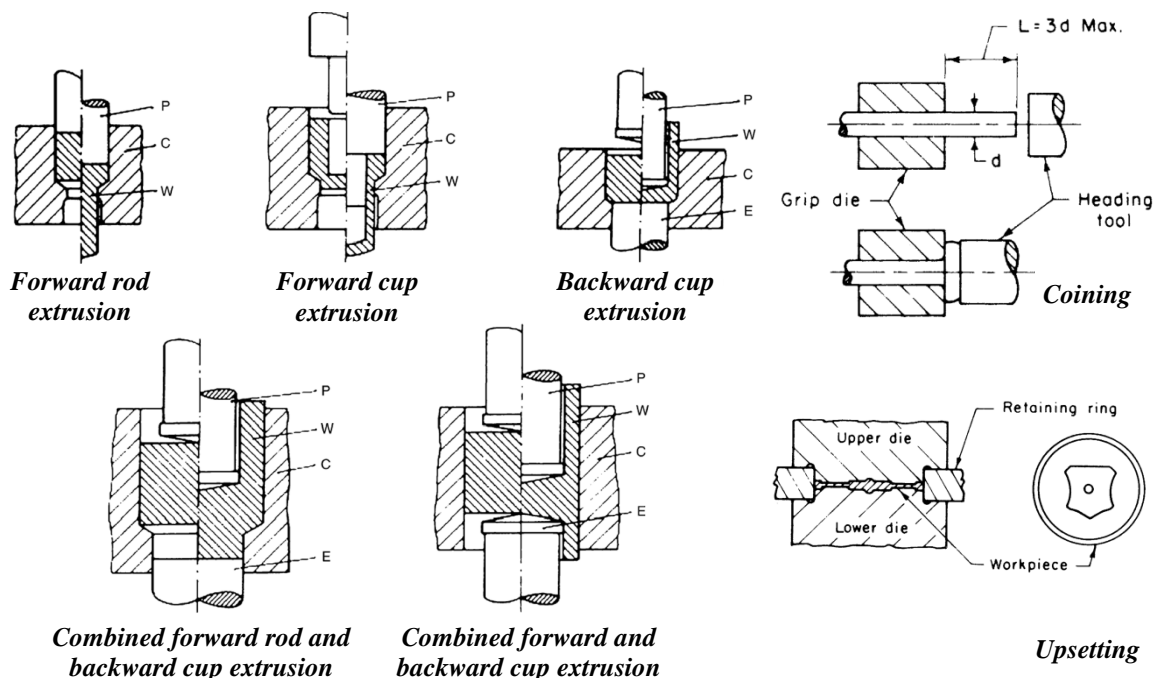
Various cold forging techniques (P, Punch; C, Container; W, Workpiece; E, Ejector).
